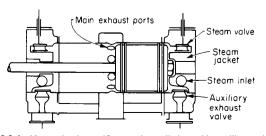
Noncondensing uniflow engine cylinder, with auxiliary exhaust valves.
